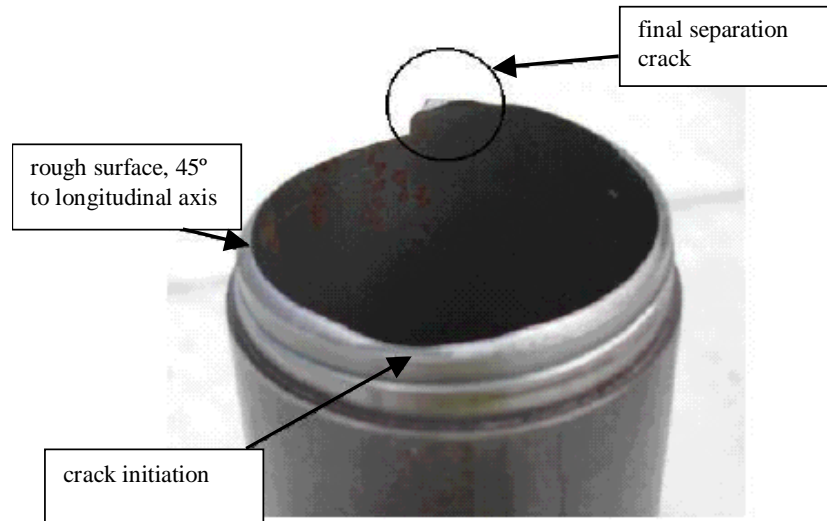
Fatigue failure surface in threaded pin joint of the specimen.
